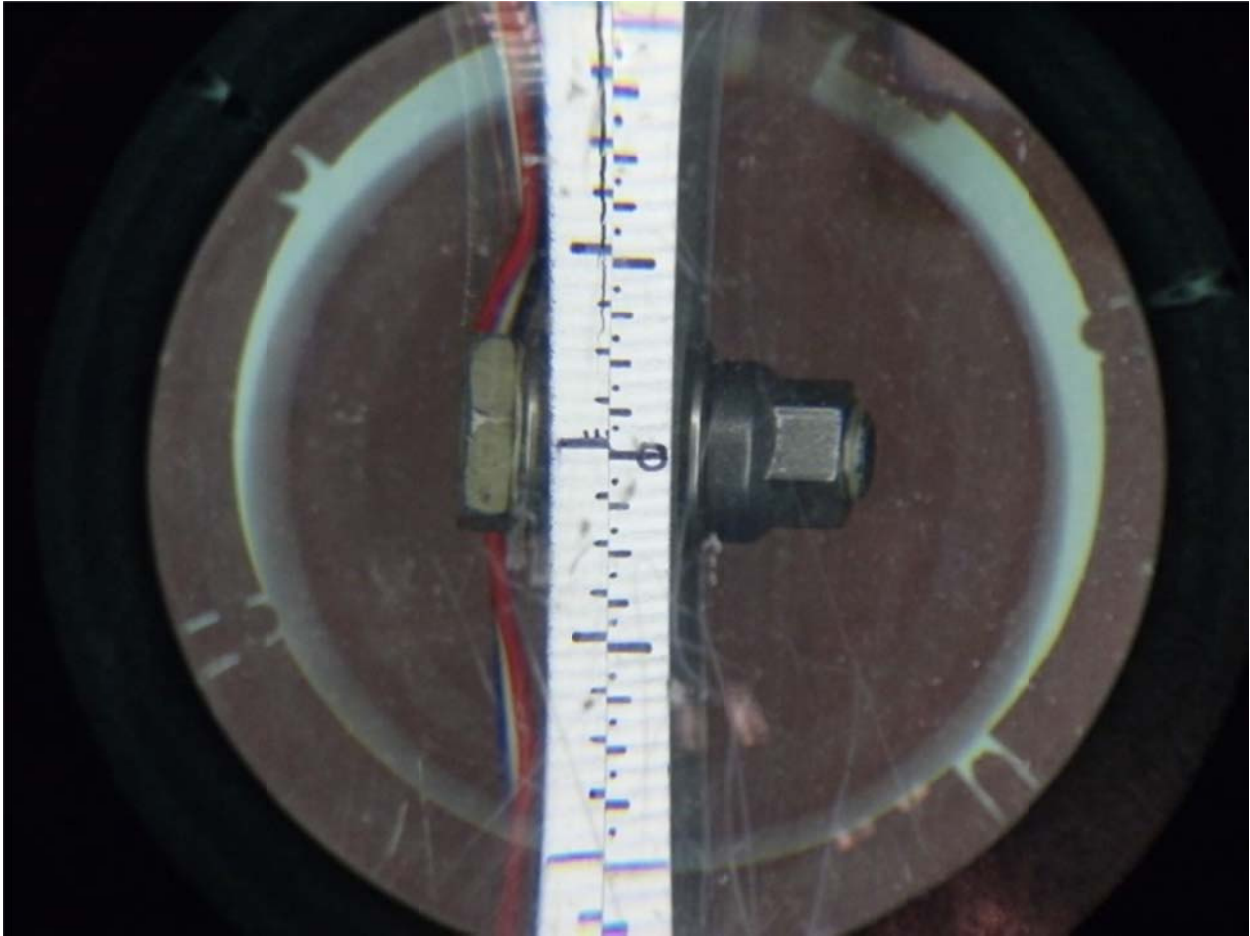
Visual Tracking of Crack-Tip Location – Propagated Past the Fastener
